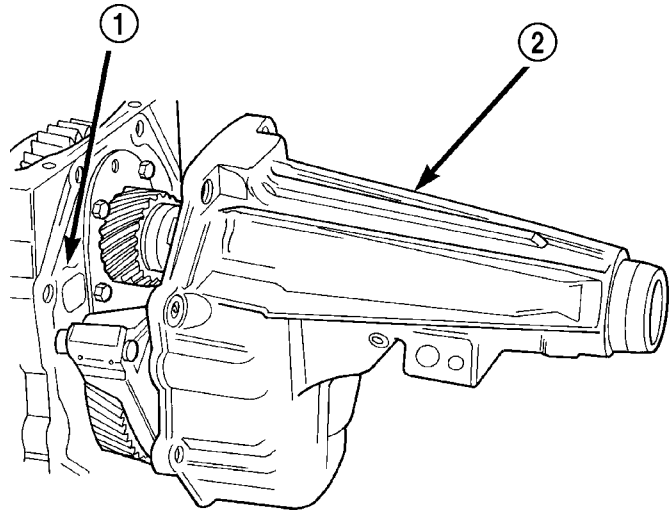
EXTENSION/ADAPTER HOUSING BOLTS
